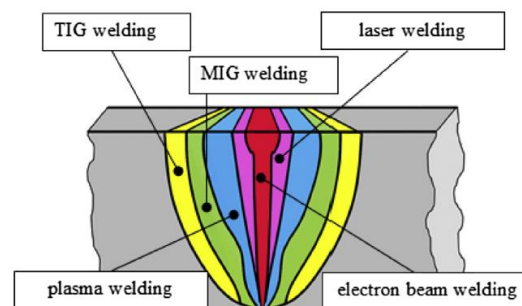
Schematic of the weld width with different welding techniques. Reprinted from Ref. [48].
